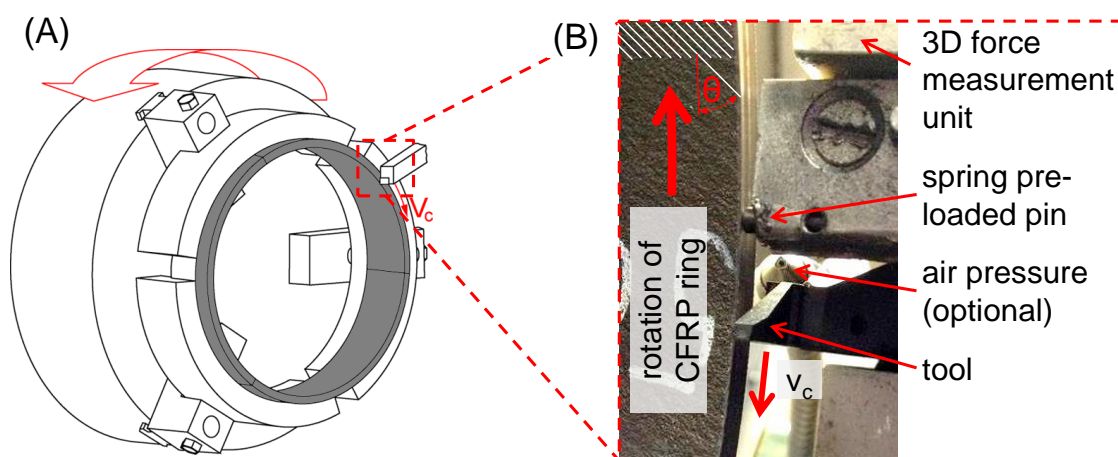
Schematic illustration of ring-shaped workpieces clamped into machine tool (A) and detailed view of contact conditions during machining (B); published in [235, 236]
